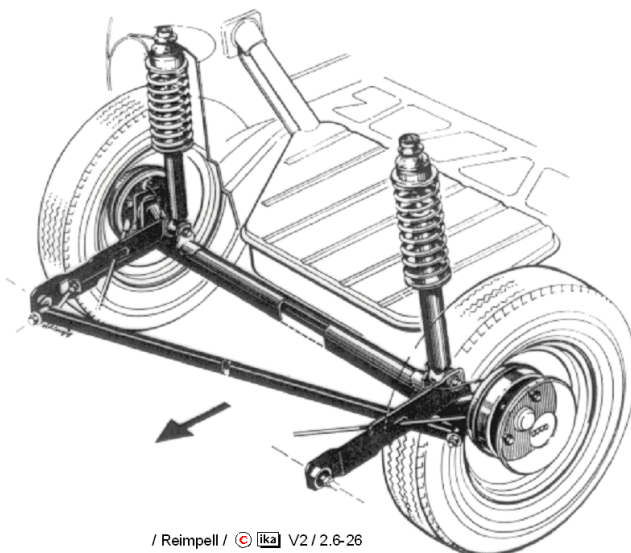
Torsion crank axle (Audi 80, 1972)
